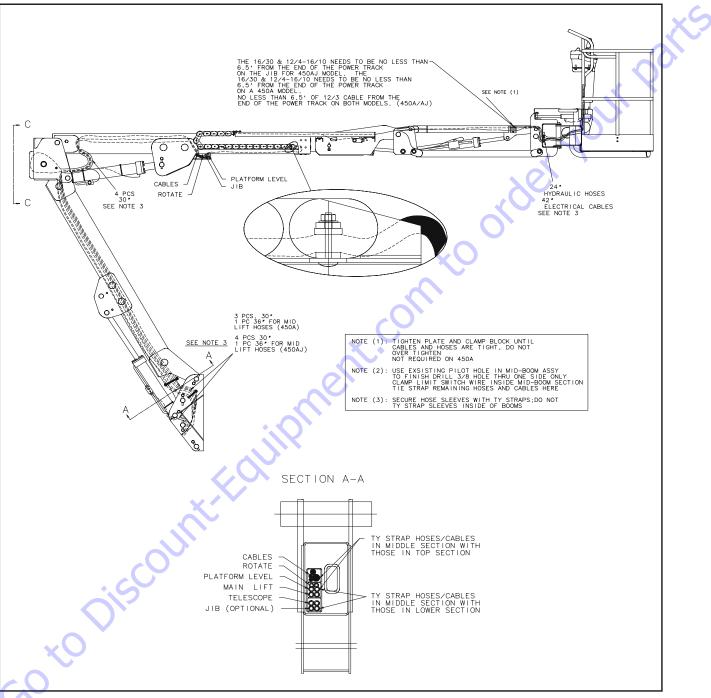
Hose and Cable Installation and Routing - Sheet 3 of 5
